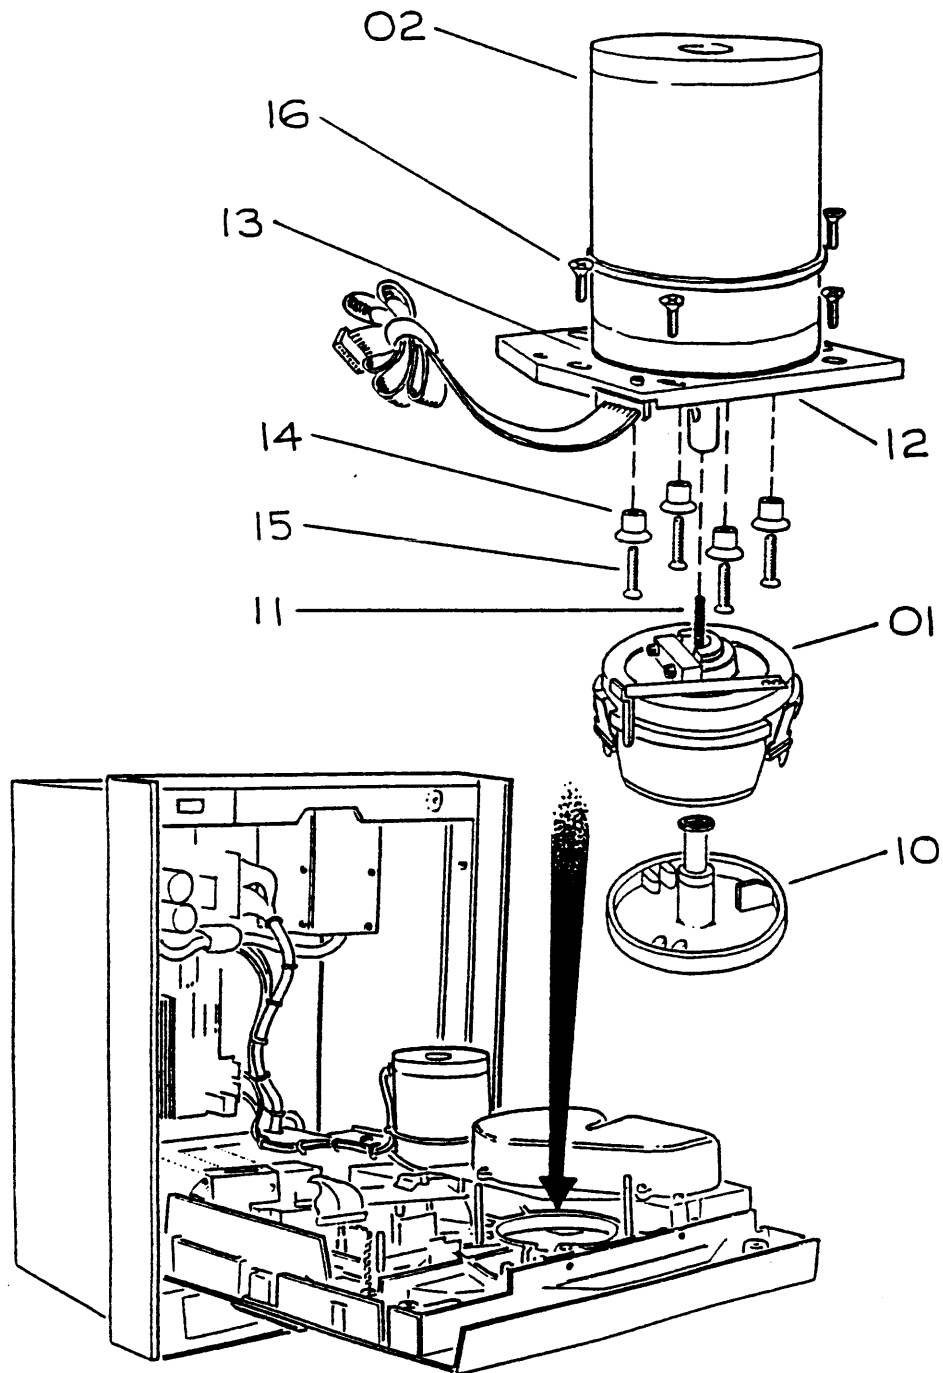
SUPPLY HUB AND MOTOR
